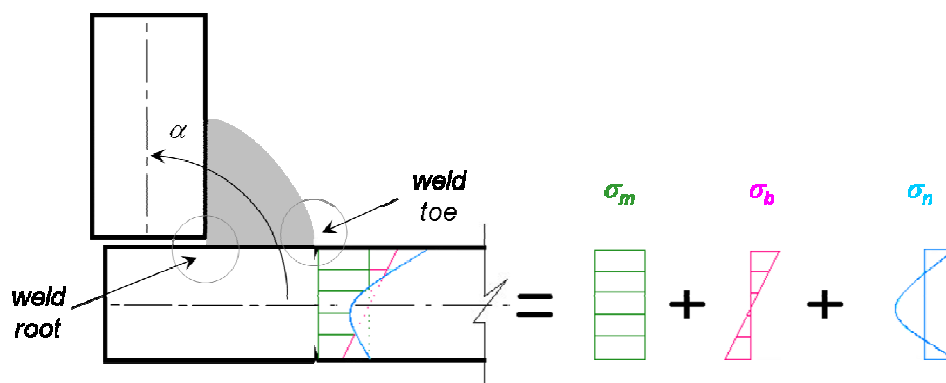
T-fillet weld. Assembly section (left side) and weld toe stress decomposition (right side).
